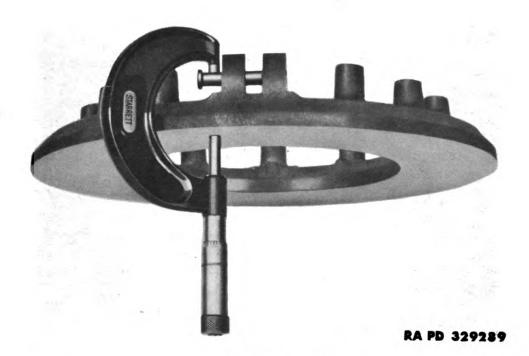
Checking Distance From Release Lever Pin to Machined Surface on Pressure Plate With Micrometer Calipers (41-C-307)
